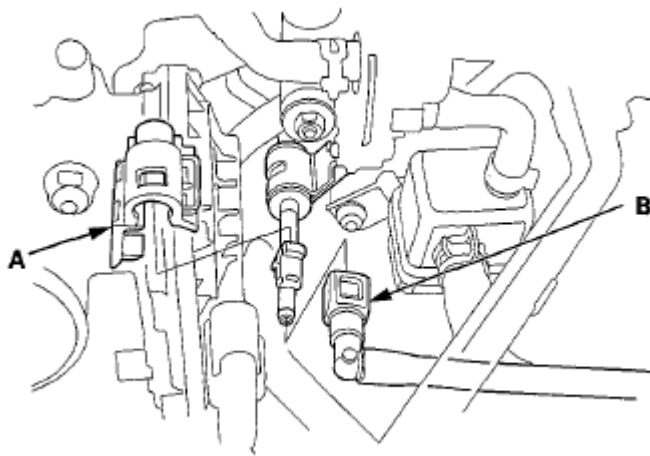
Identifying Quick-Connect Fitting Cover & Fuel Feed Hose
